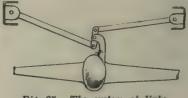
The system of links employed with the Arrol-Johnston rear spring to prevent rolling.
